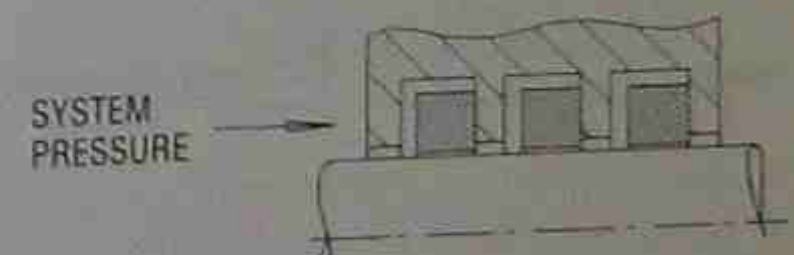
A single bushing can be replaced by a series of seal rings.
